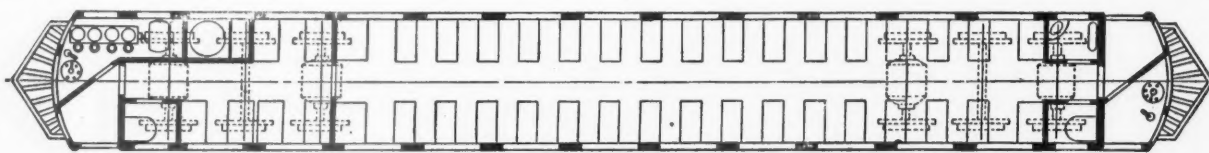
Floor Plan of Chicago & Alton Motor Car.
